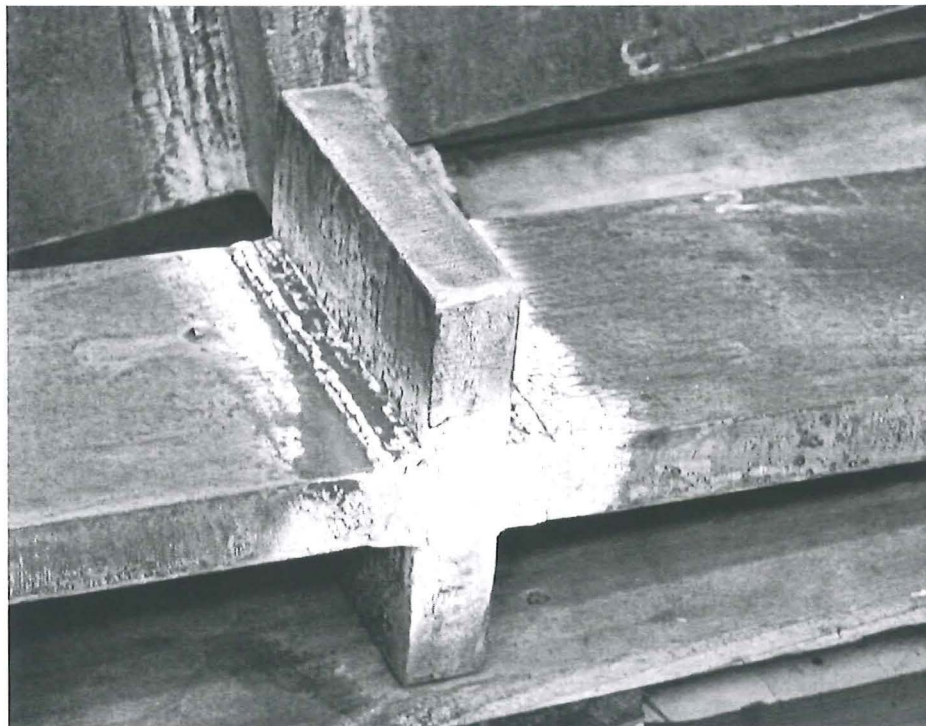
X-joint with load carrying full penetration welds with low SCF (Specimen type B)
